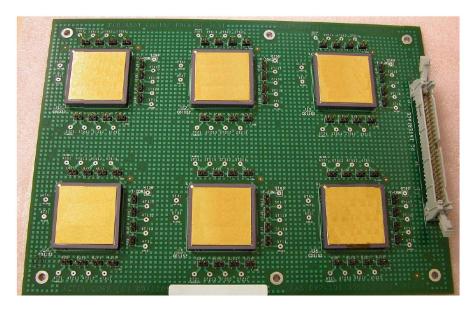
CCGA Thermal Test PCB After Daisy Chain CCGA Package Assembly
